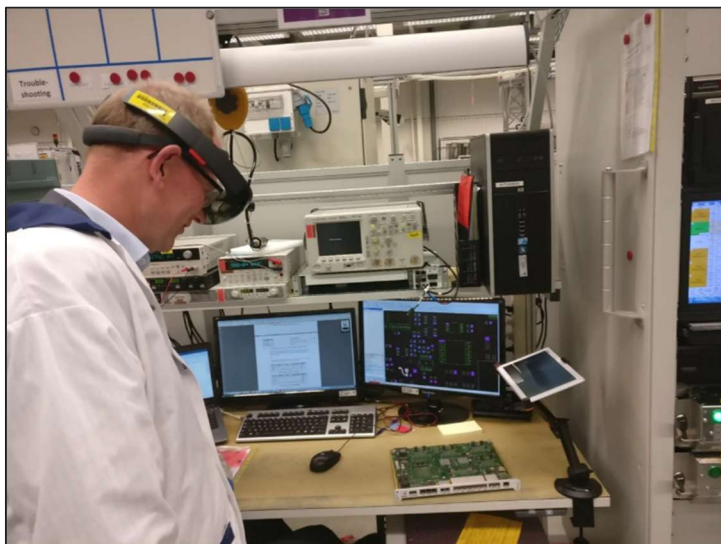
Printed circuit board check in AR using Microsoft HoloLens.
